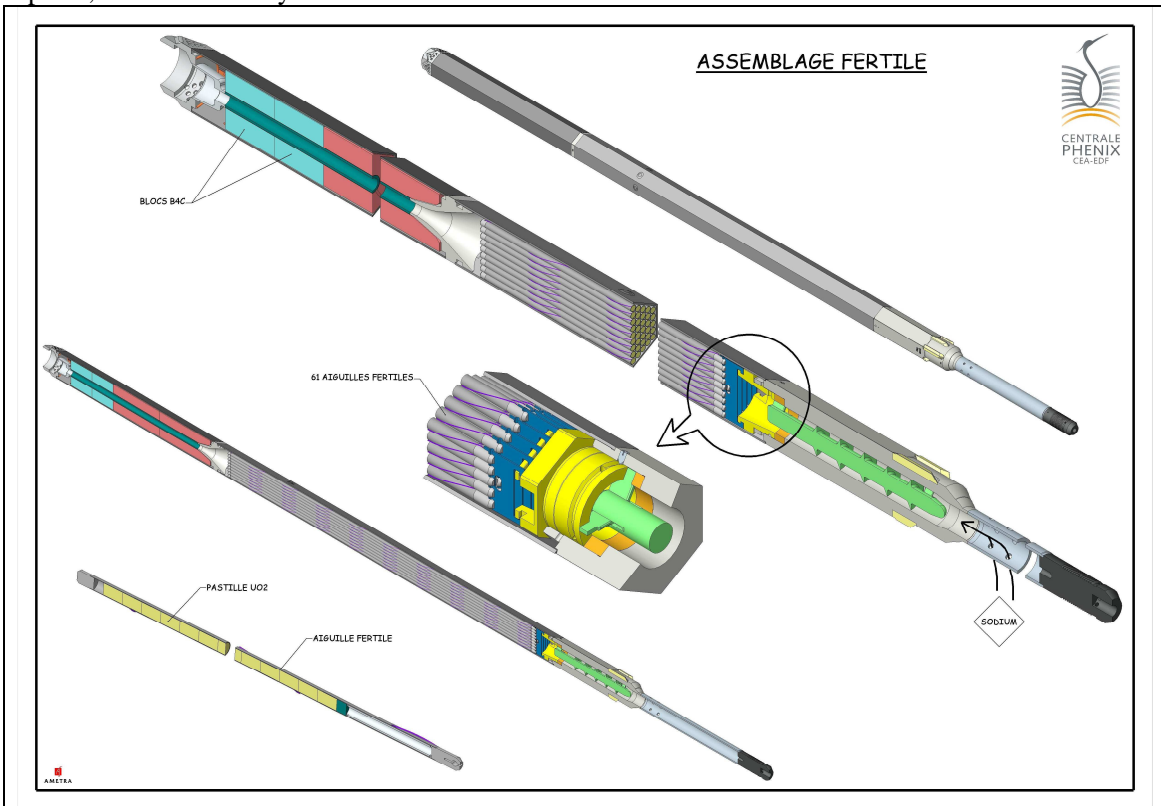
Global view of an assembly of the PHENIX reactor
